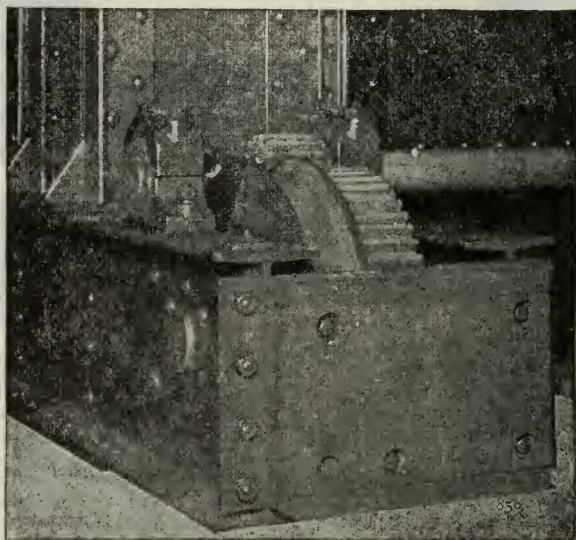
,214.—Niles crane construction: Bridge end trucks showing the two bearings for bridge drive shaft and the steel plate with bumper block at end of truck.
